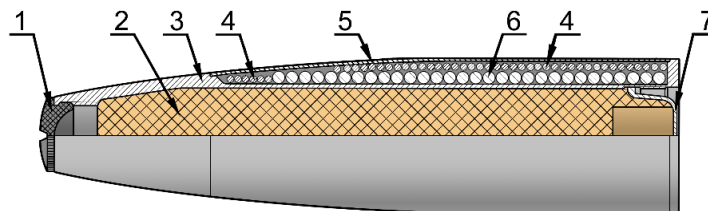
Main parts of the 128 mm HE warhead with a base detonating assembly: (1) fuze well closing plug, (2) explosive charge, (3) warhead body, (4) smaller steel balls, (5) liner, (6) larger steel balls and (7) warhead base
